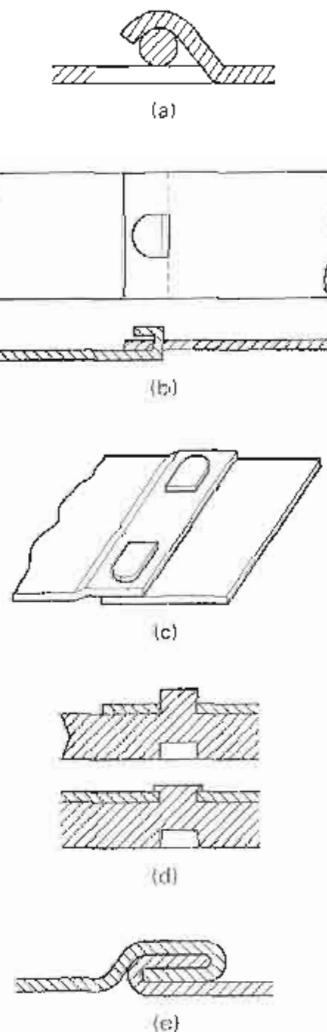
Several types of integral fasteners: (a) lanced tab to fasten wires or cables to sheet or plate; (b) and (c) assembly through folded tabs and slots for different types of loading; (d) use of a flattened embossed protrusion; (e) single-lock seam.
